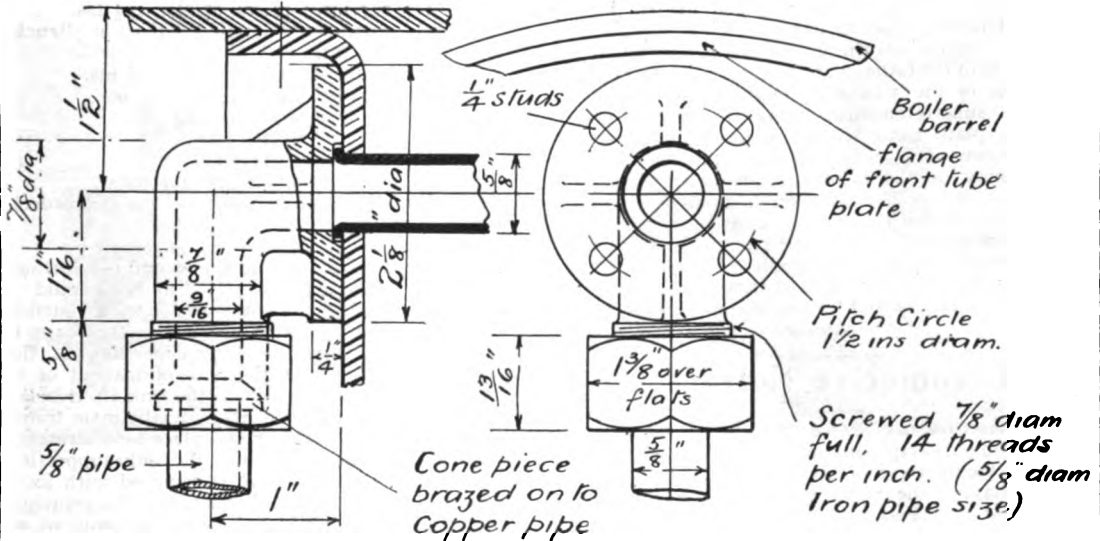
SINGLE PIPE FLANGED UNION ELBOW CONNECTION FOR MAIN STEAMPIPE.
